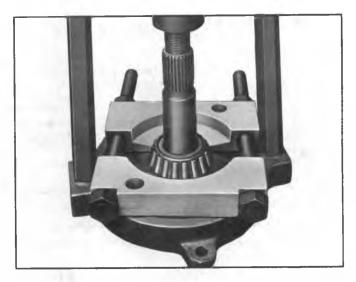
D-Removing Inner Pinion Bearing Cone and Roller
